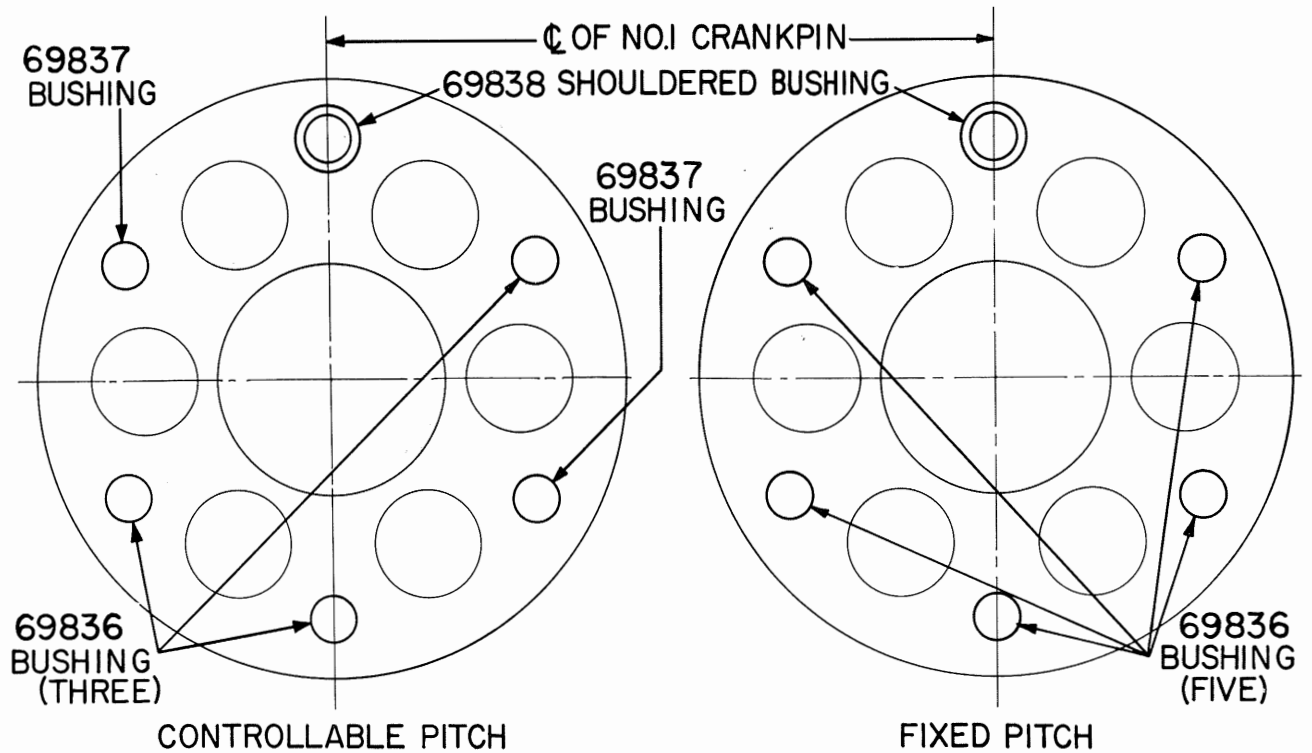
Arrangement of Propeller Flange Bushing, O-340 Engine
